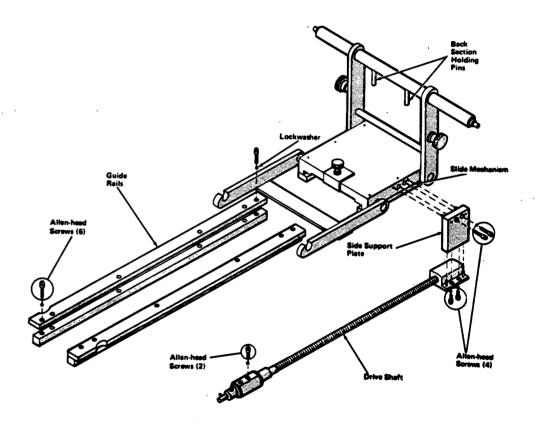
DRIVE SCREW AND SLIDE MECHANISM ASSEMBLY.
